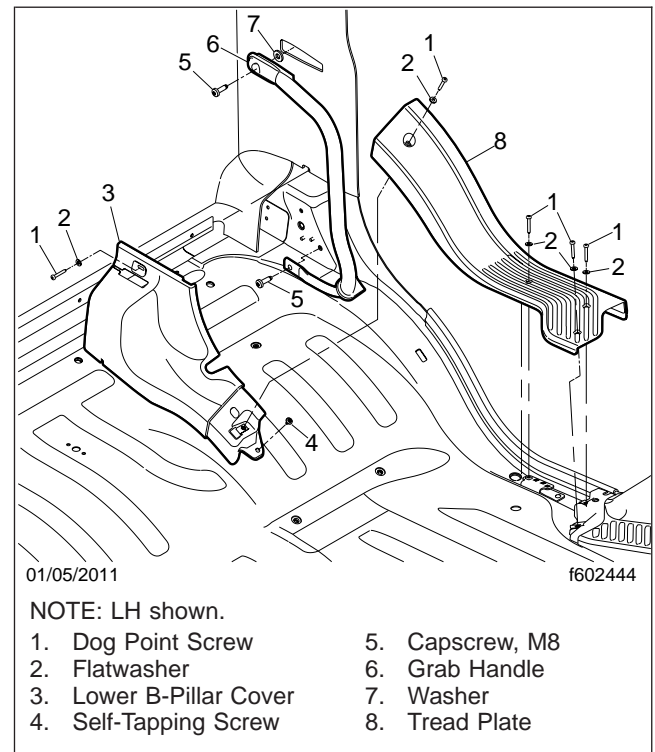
, Tread Plate and Lower B-Pillar Cover Installation
